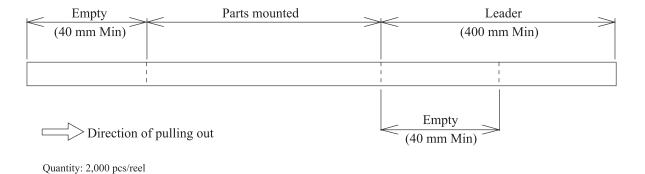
ZHX1810 Tape Dimensions and Configuration (Unit: mm)
